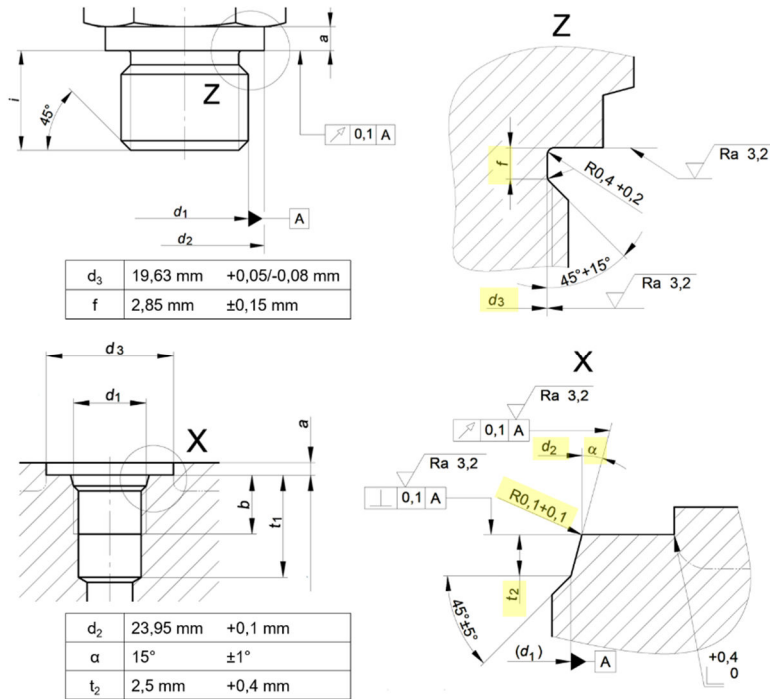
Drawings of the screw-in geometry, size 7/8-14 UNF-2A
